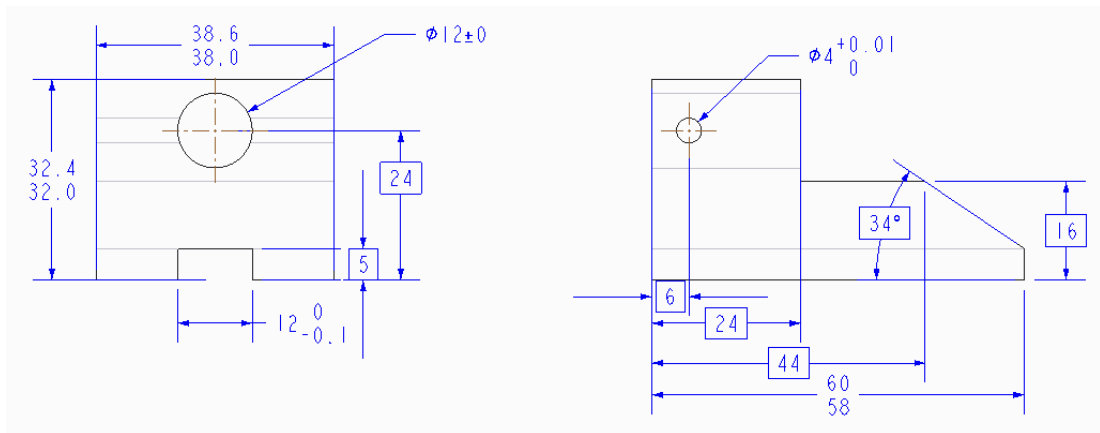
Drawing views after adding tolerance to the remaining dimensions
